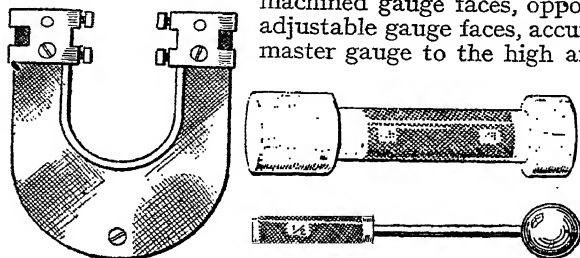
Adjustable snap gauge, "go" "not go" plug gauge, and ball-ended gauge.
